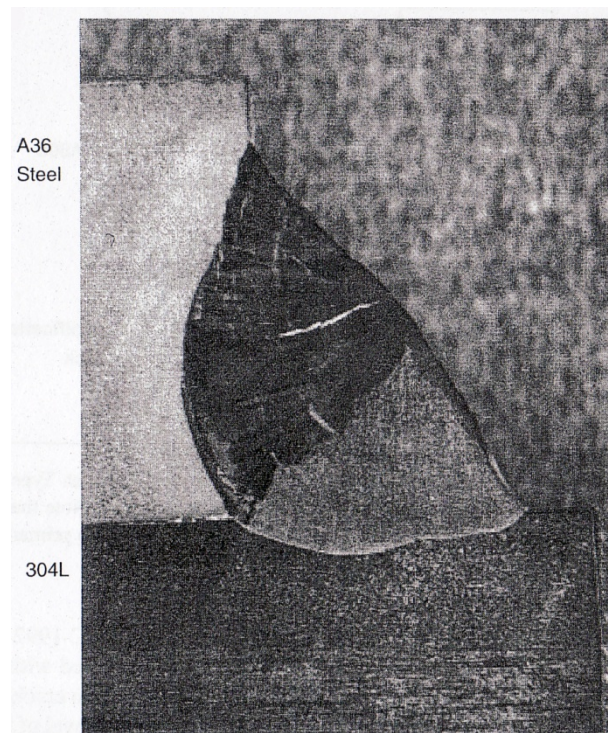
Solidification cracking in a 309L submerged arc fillet weld between A36 steel and 304L stainless steel.
